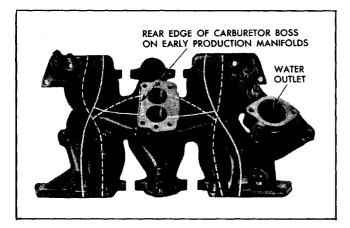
Intake Manifold—2 Barrel Carburetor
